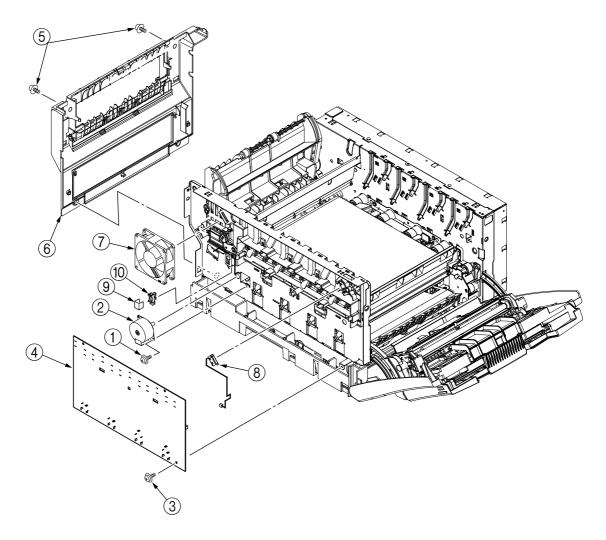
FAN (Fuser) / Belt Motor / High Voltage Power Supply Board / Cover Open Switch / Image Drum Up/Down Sensor
